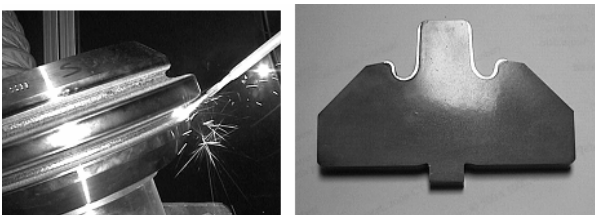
Laser cladding tool for sheet metal rolling (Photo courtesy NedClad)
